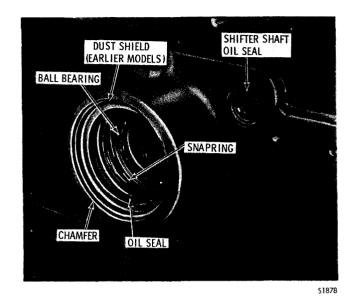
Output shaft front bearing, oil seal and dust shield
